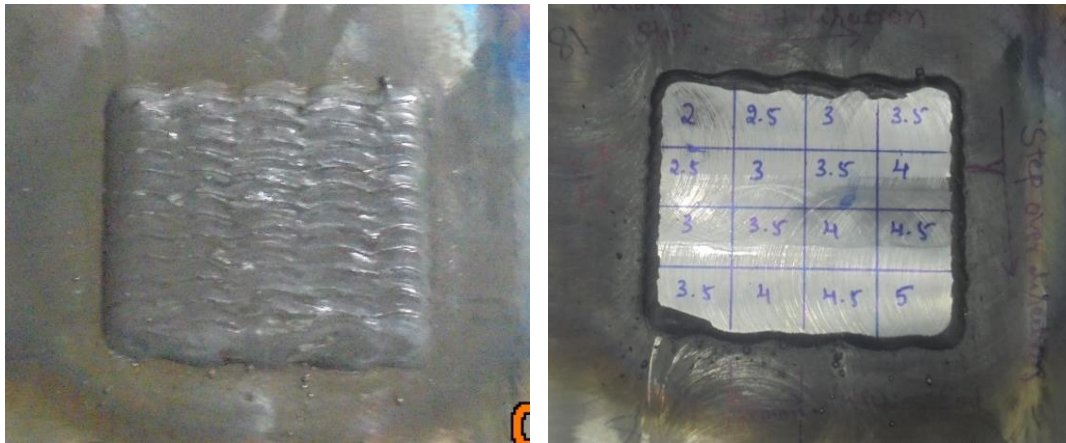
Deposited weld beads of two dimensional gradient.
